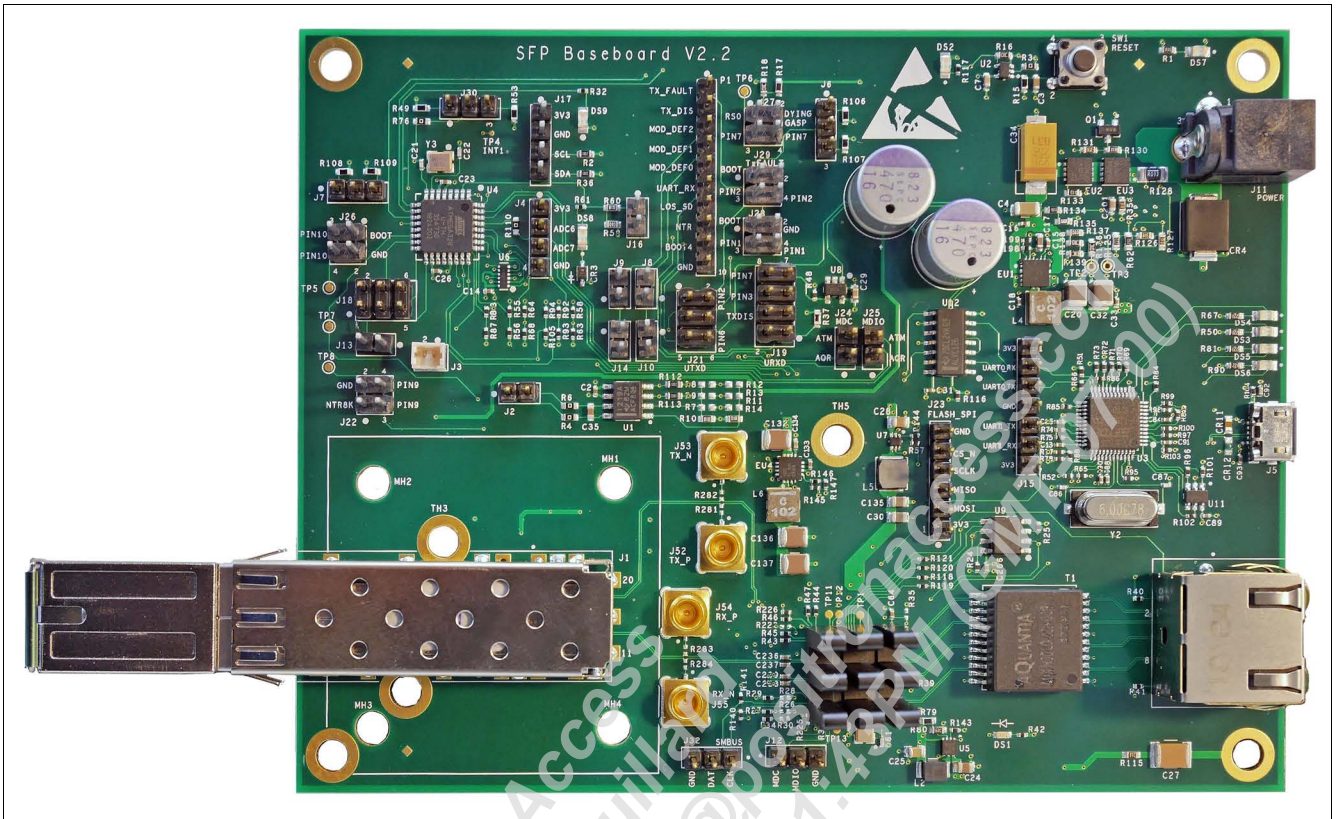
EASY PRX126 REF BOARD Inserted into the EASY 98900 Base Board
